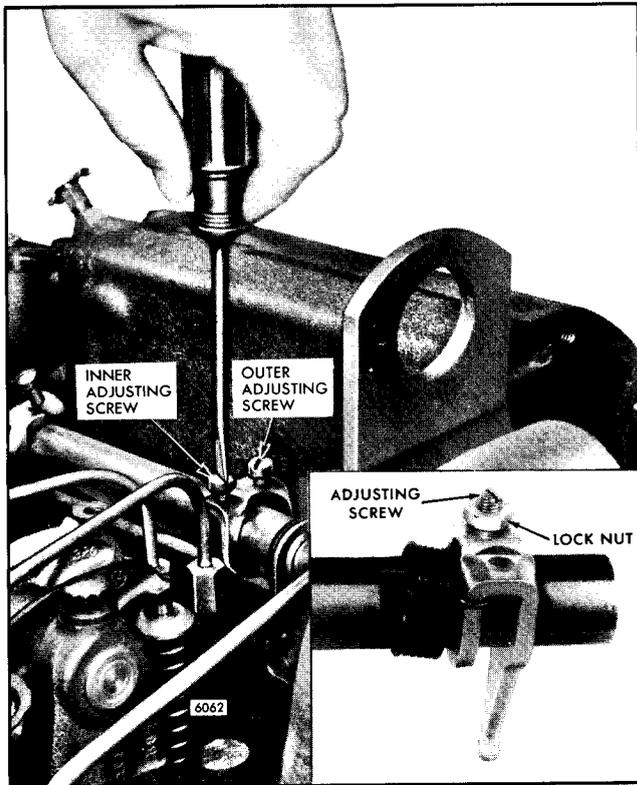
Adjusting Height of Rack Control Lever Adjusting Screws
